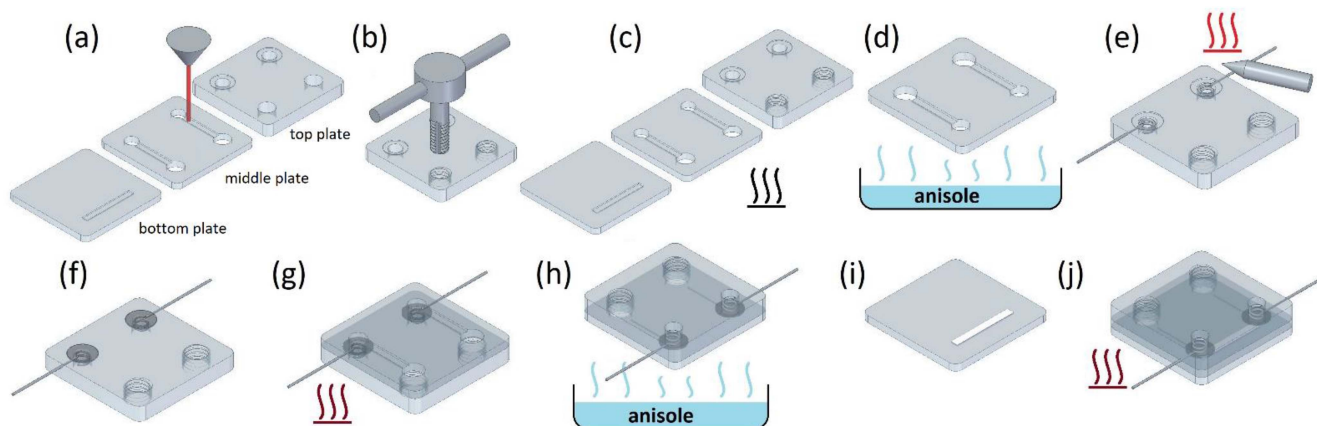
Fabrication process of the EOP with ion-exchanging membrane. (a) Laser engraving of the channel structures and laser cutting. (b) Thread cutting for later Luer fittings. (c) Annealing process to avoid stress cracks. (d) Solvent treatment in anisole vapor to enable a strong bonding afterward. (e) Bending and fixing of the platinum wires used as electrodes. (f) Placing of the ion-exchanging membranes. (g) Thermal bonding process. (h) Solvent treatment in anisole vapor to enable a strong bonding afterward. (i) Placing of the laser cut glass fiber filter. (j) Thermal bonding process.
